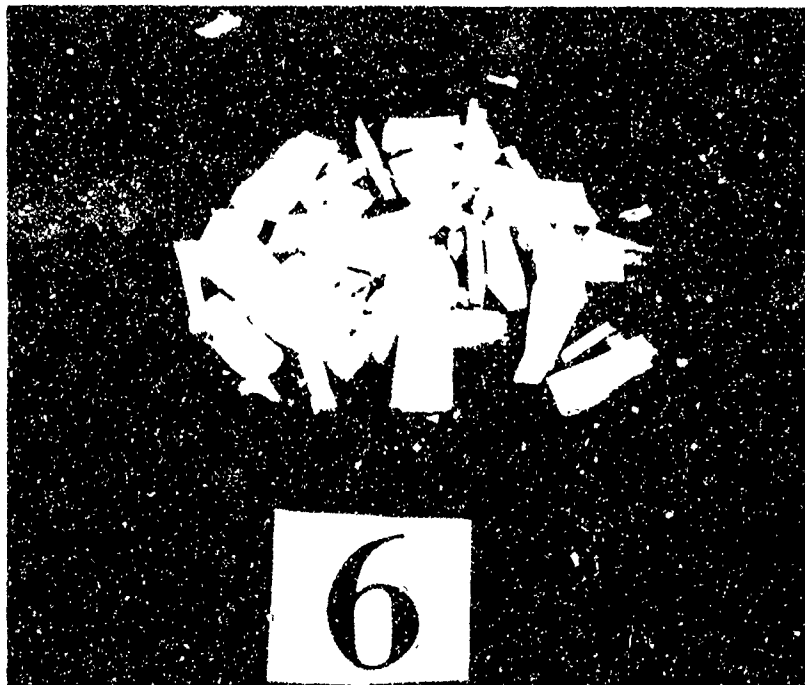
Fractured tube, path 6, Lot 5A, test T1839.
